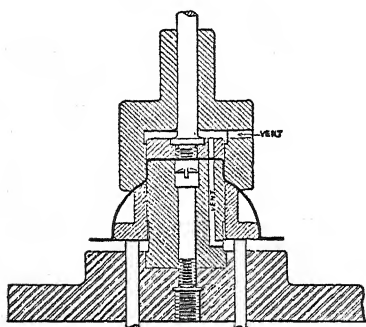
Third Redrawing Die to Produce Part Shown at D.
